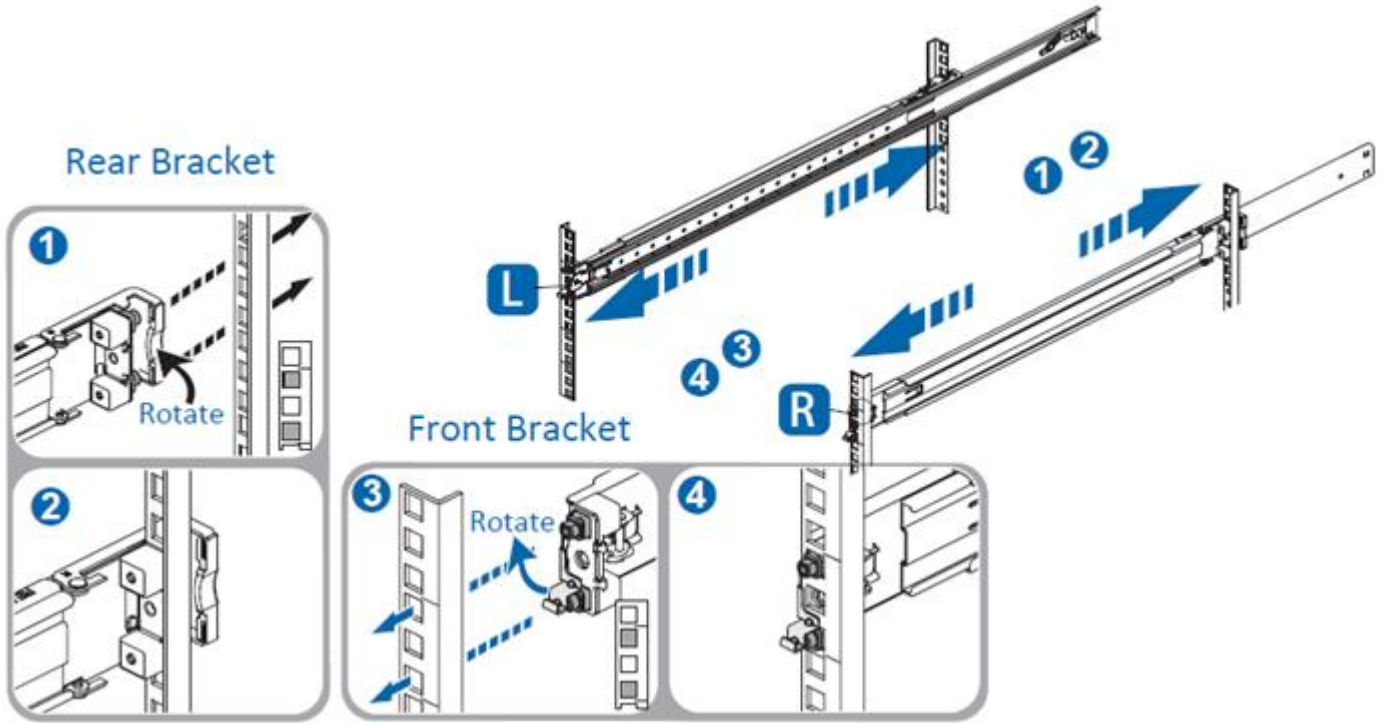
Rail Kit - Rail Installation to Mounting Posts
